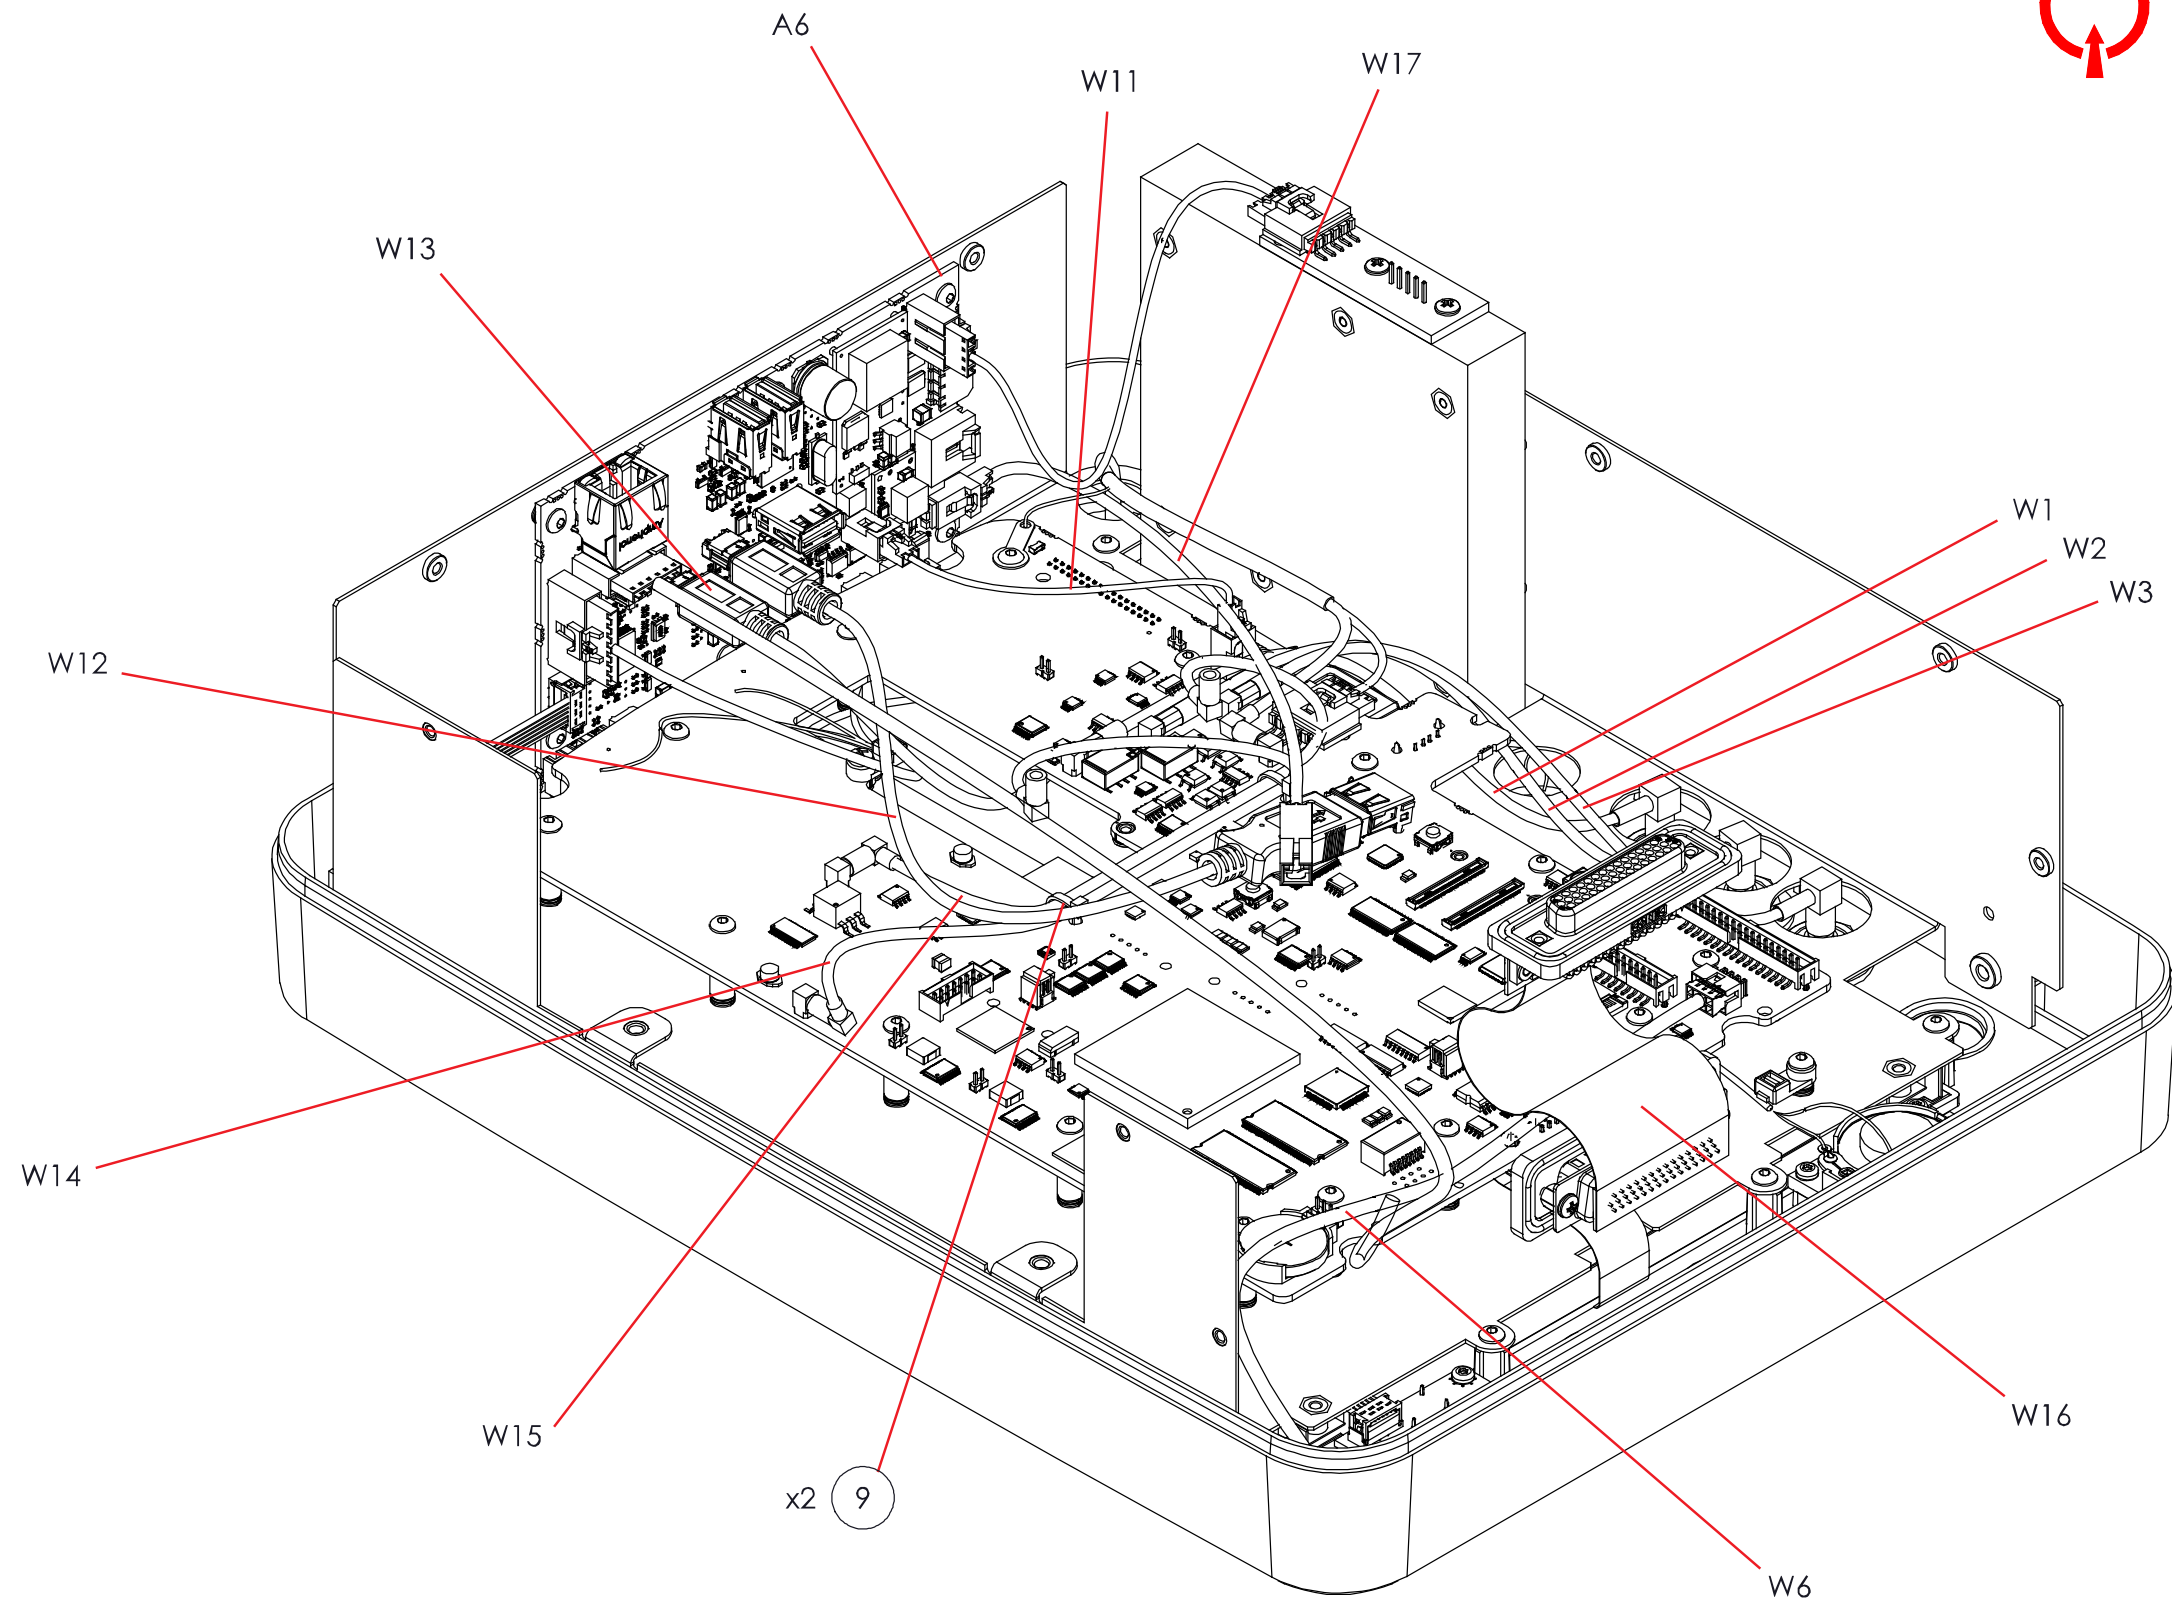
Front Chassis / Panel Assy (Sheet 6 of 6)
